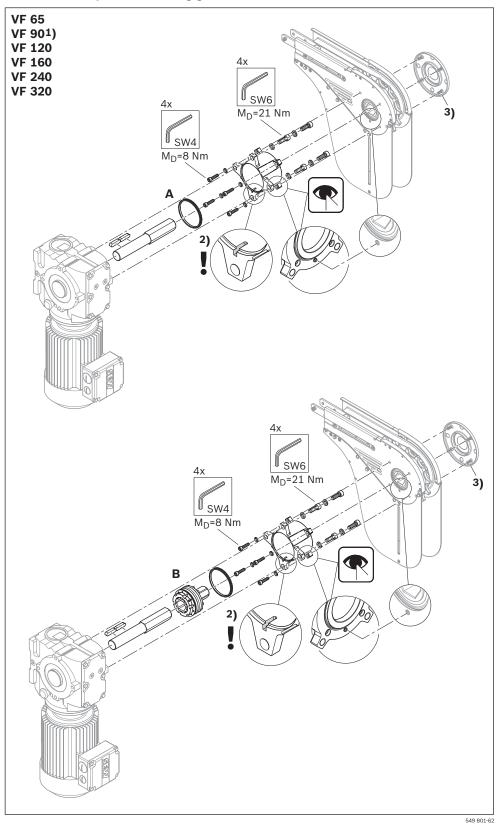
Basic unit, AL system, installing gear motor GM = 2
